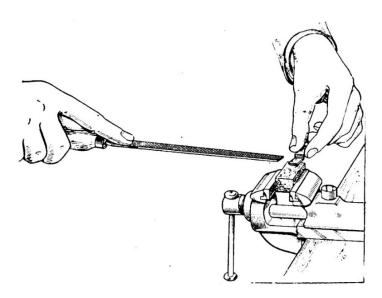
Holding Piece Lightly on Cork to File Flat and True
